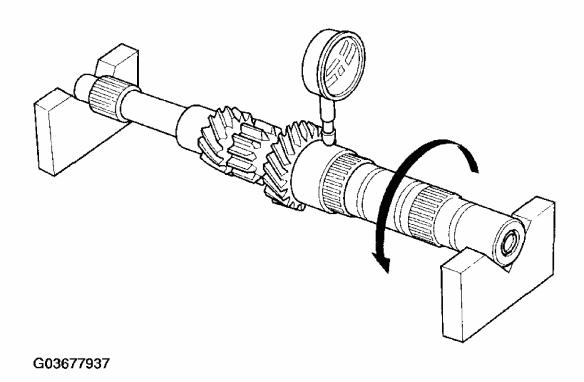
Measuring Mainshaft Runout Courtesy of AMERICAN HONDA MOTOR CO., INC.
